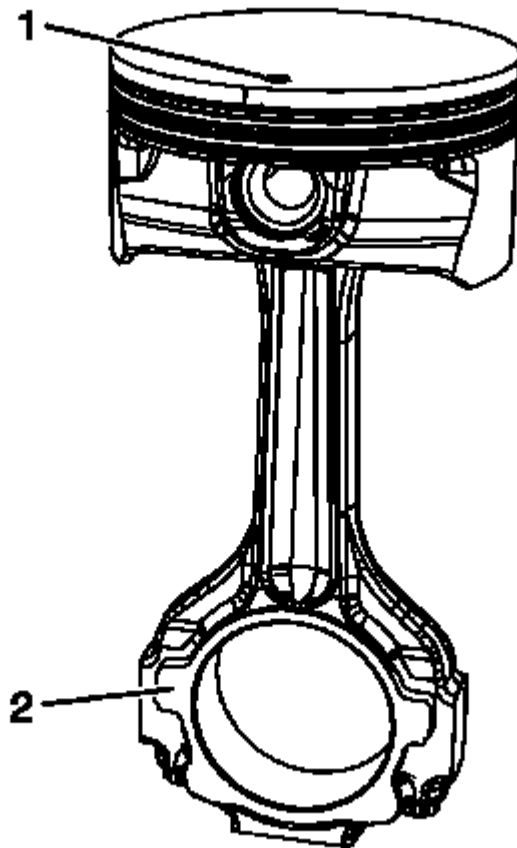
View of Mark On Top Of Piston & Connecting Rod Tab
